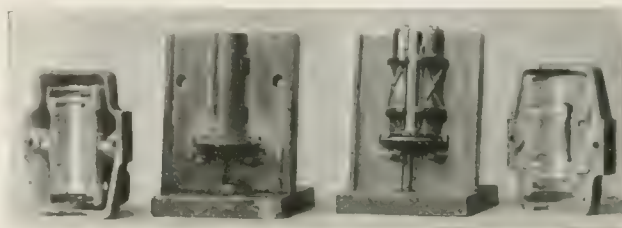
MANDRELS FOR BABBITTING SPLIT BEARINGS
